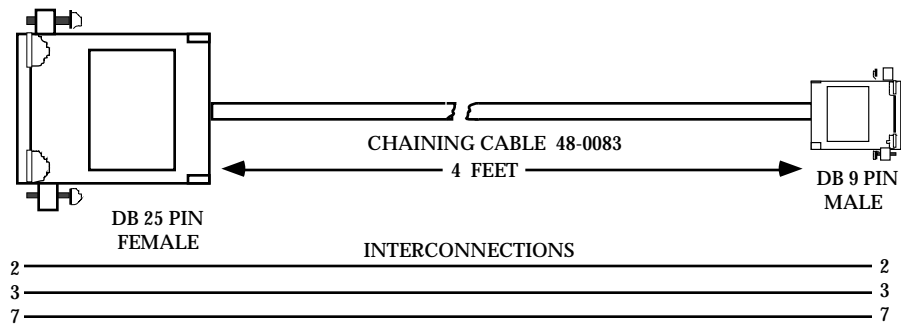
Chaining Cable [Auxiliary Port to RS-232 Port (48-0083)]
